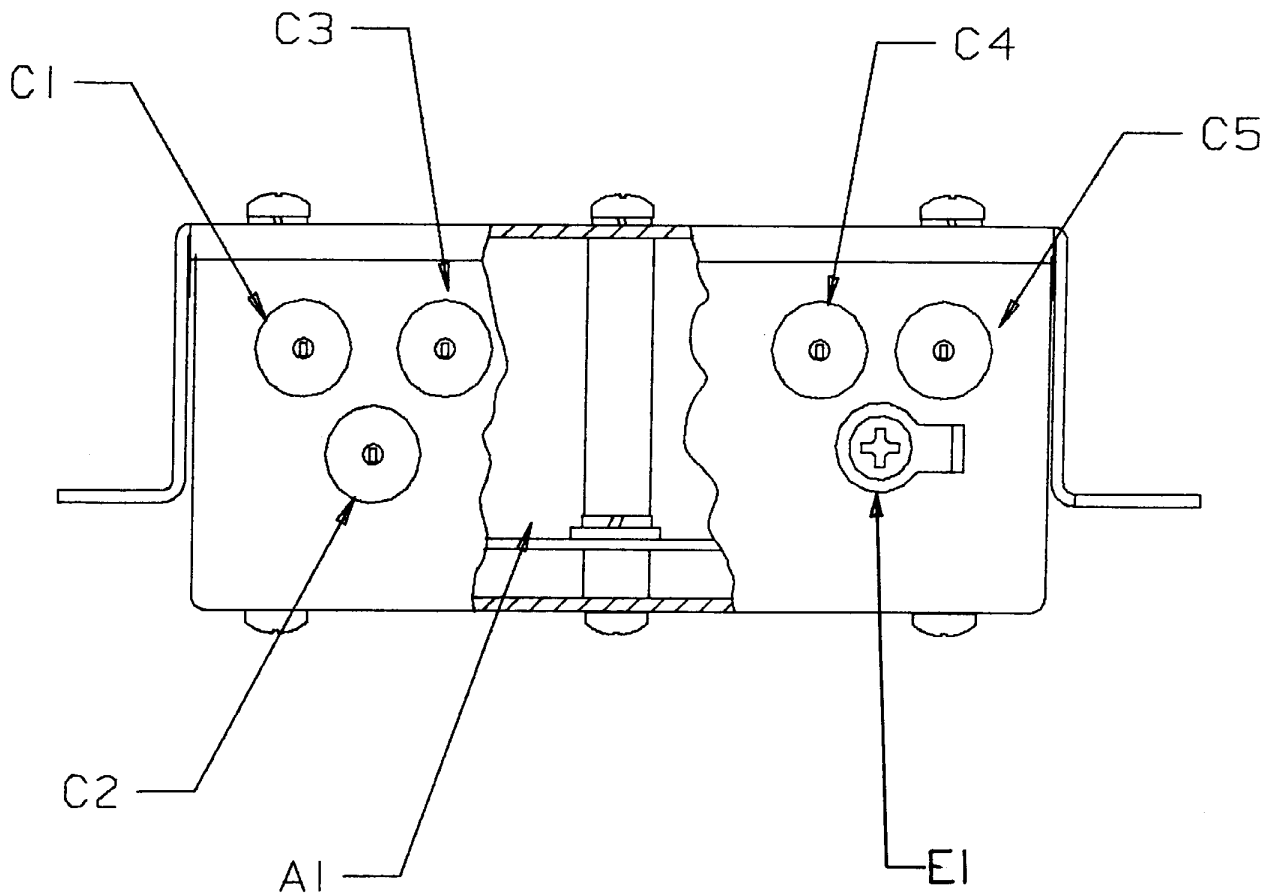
Converter Assembly A13A6 Component Location Diagram (10073-2250, Rev. E)
